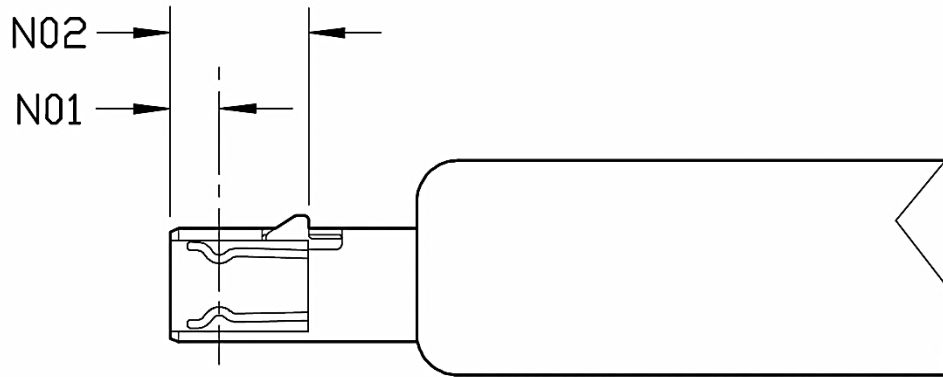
Active Latching Dimensions for x4 Free Cable Assemblies
